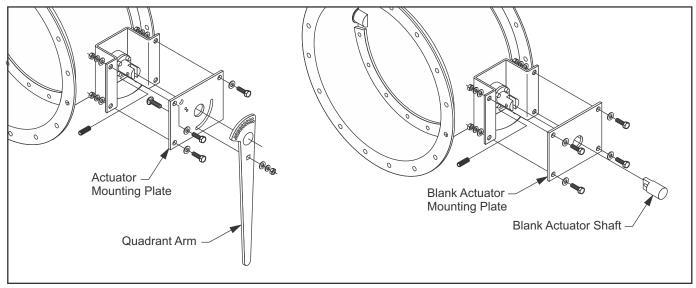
16" - 34" Heavy Duty Industrial Damper Actuator Removal for Customer Supplied Actuator.
